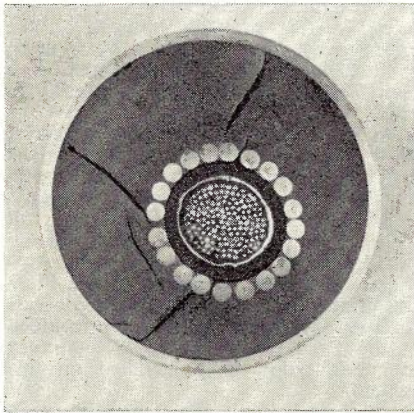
A cross-sectional view of the encapsulated joint without polythene liner showing strong adhesion to the brass tube; a defined air-gap around polythene sheath, and radial cracks in the casting resin.
